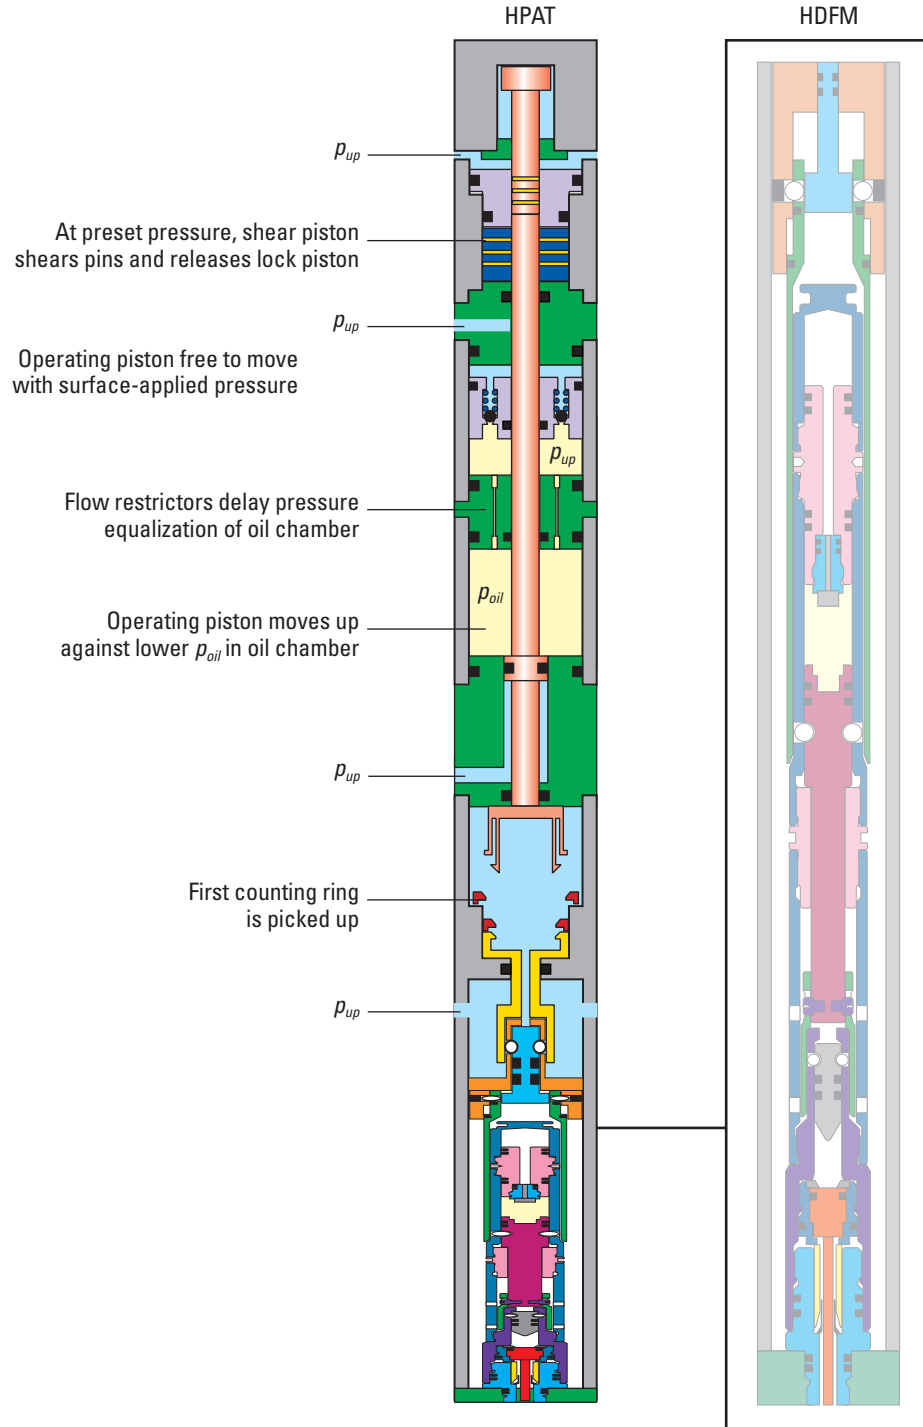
The first pressure-up cycle shears pins. p_{up} = high-side shear pin pressure, p_{oil} = oil pressure in chamber of tool.
